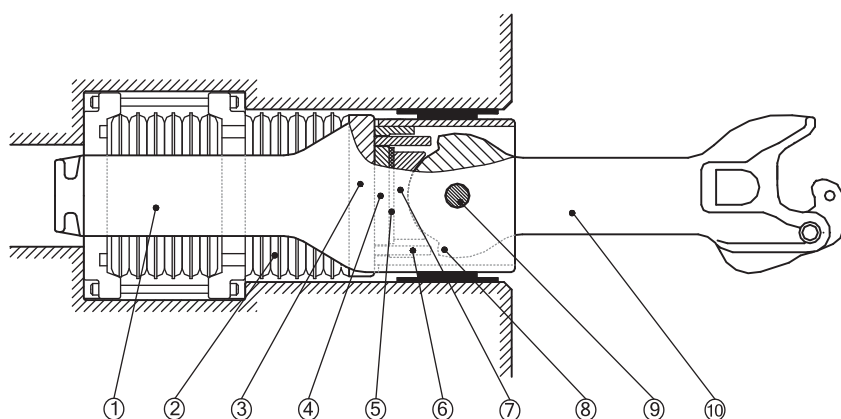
The structure of diesel-electric locomotive coupler with arc surface contact. (1) Coupler yoke, (2) Rubber buffer, (3) Front plate, (4) Slide block, (5) Friction pad, (6) Bumpstop, (7) Follower, (8) Shoulder, (9) Yoke key, and (10) Coupler.
